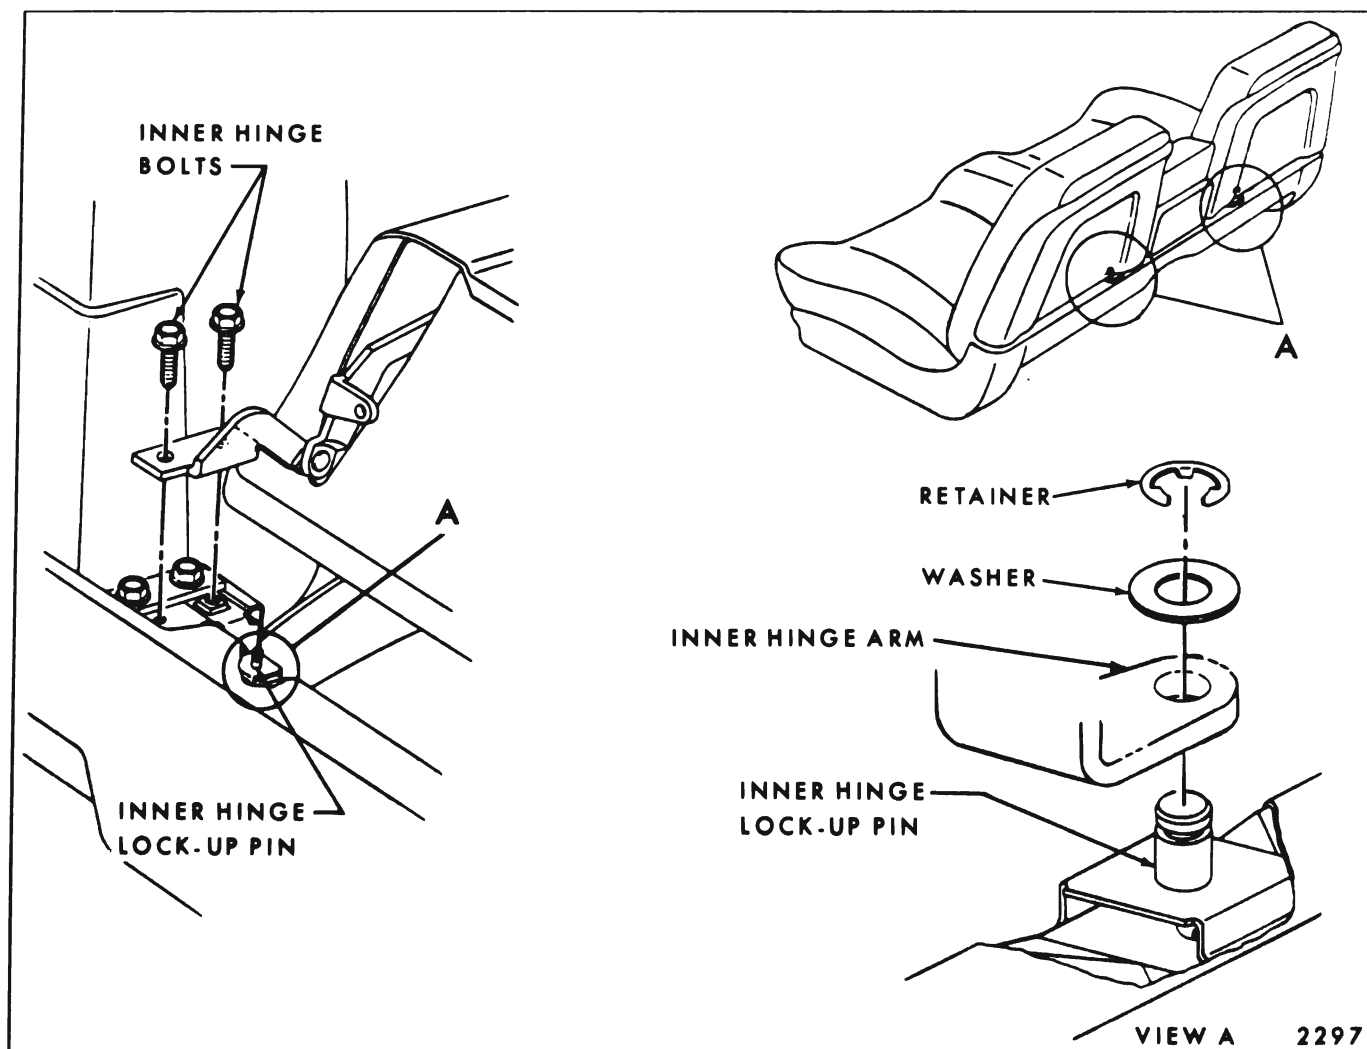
Strato Full Width Seat Back Attachment - Chevrolet 16639 Style
